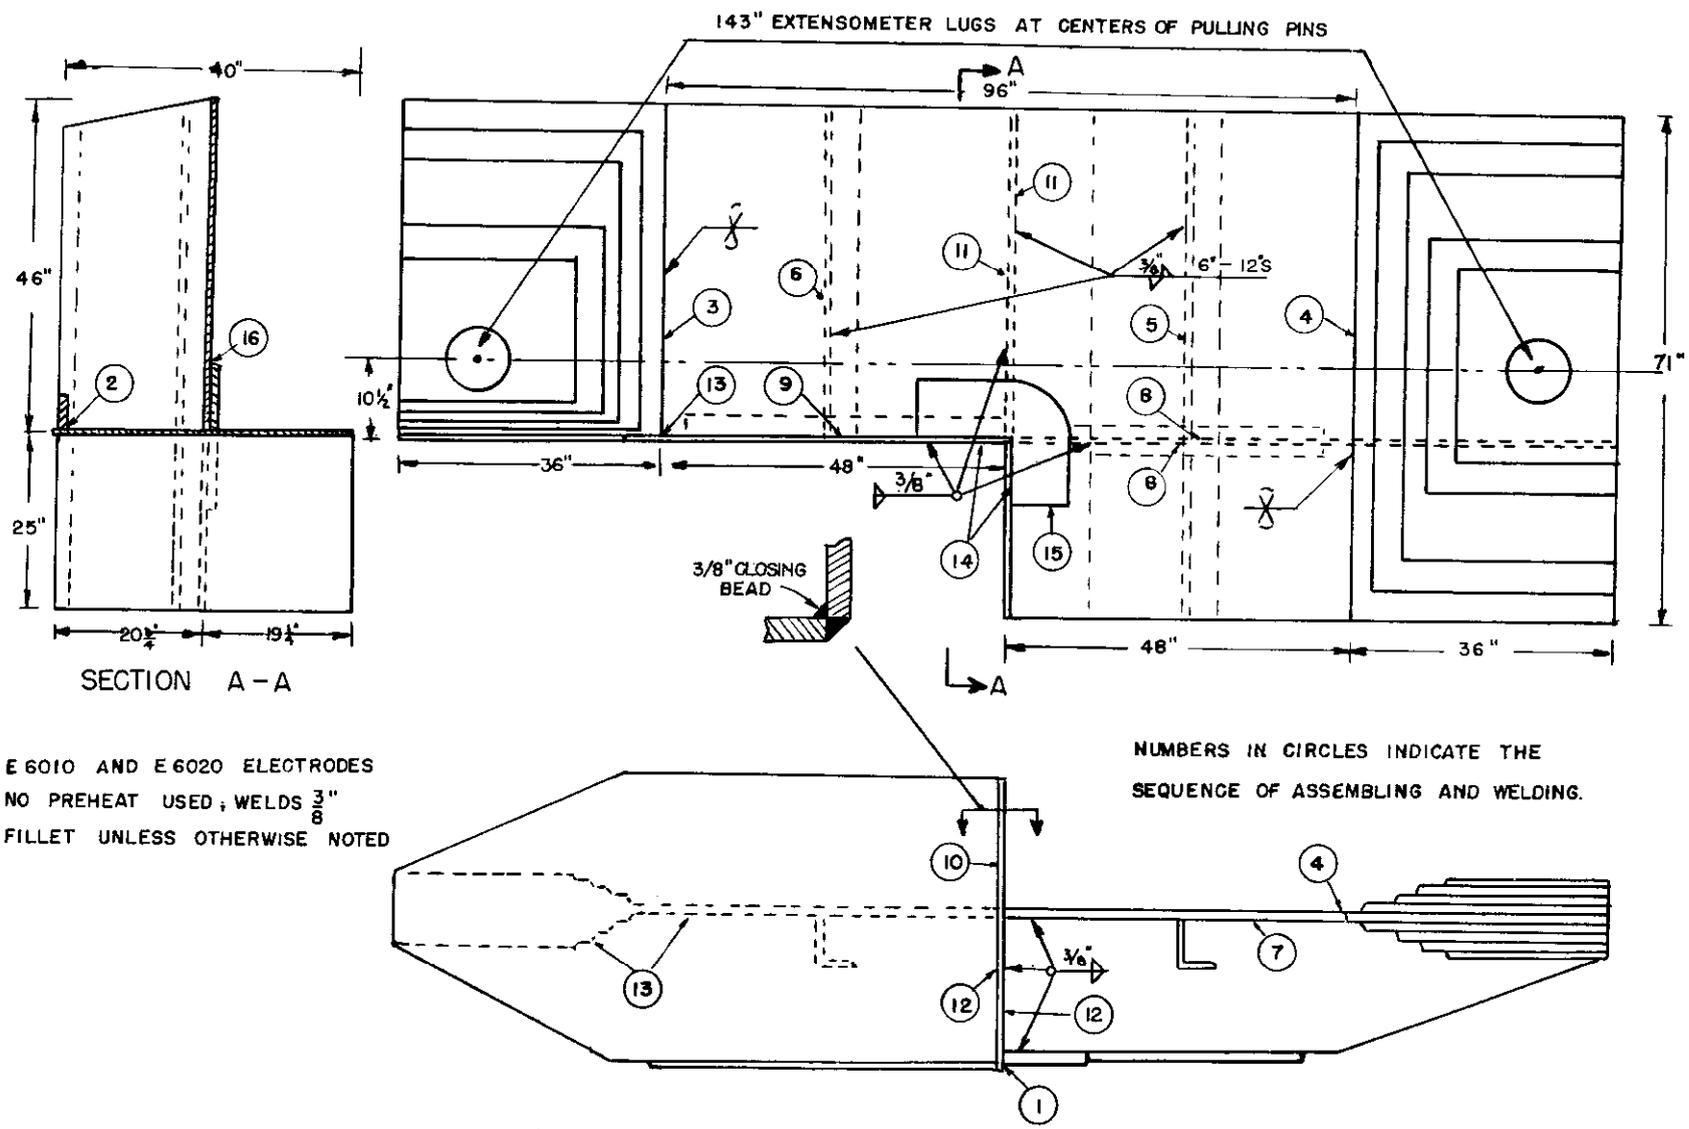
HATCH CORNER TYPE SPECIMEN USED IN THE INVESTIGATION
